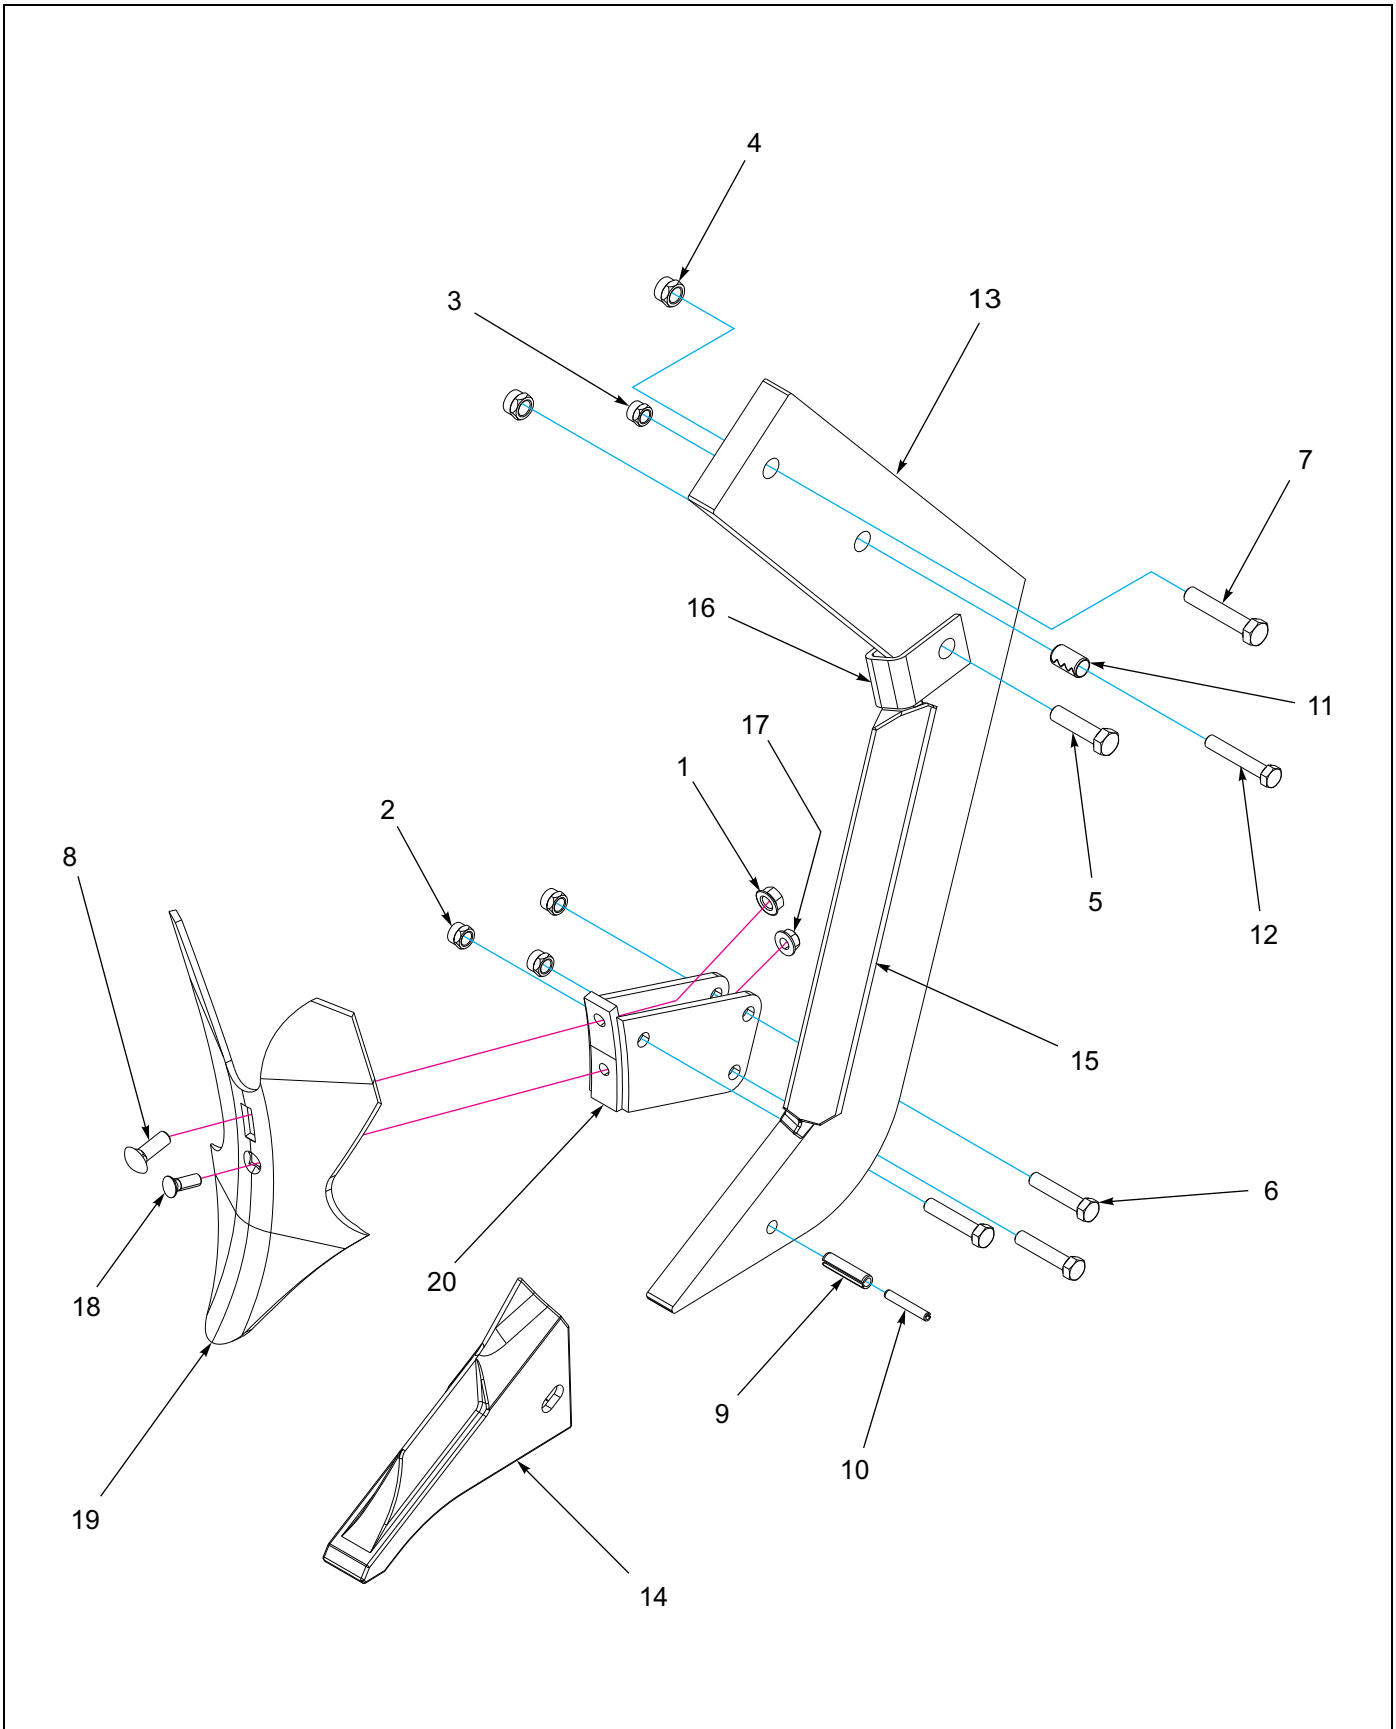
Straight Leg Shank Assembly Point Assembly
